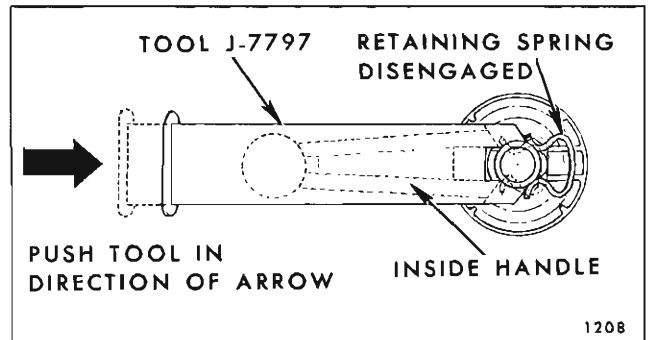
D12—Disengaging Door Inside Handle Retaining Spring
